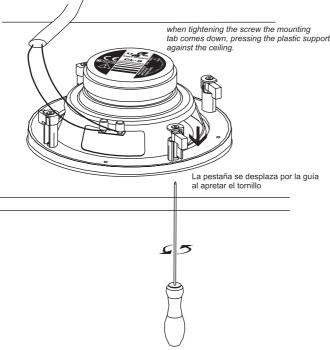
fixing system: when tightening the screw the mounting tab comes down, pressing the plastic support against the ceiling.
